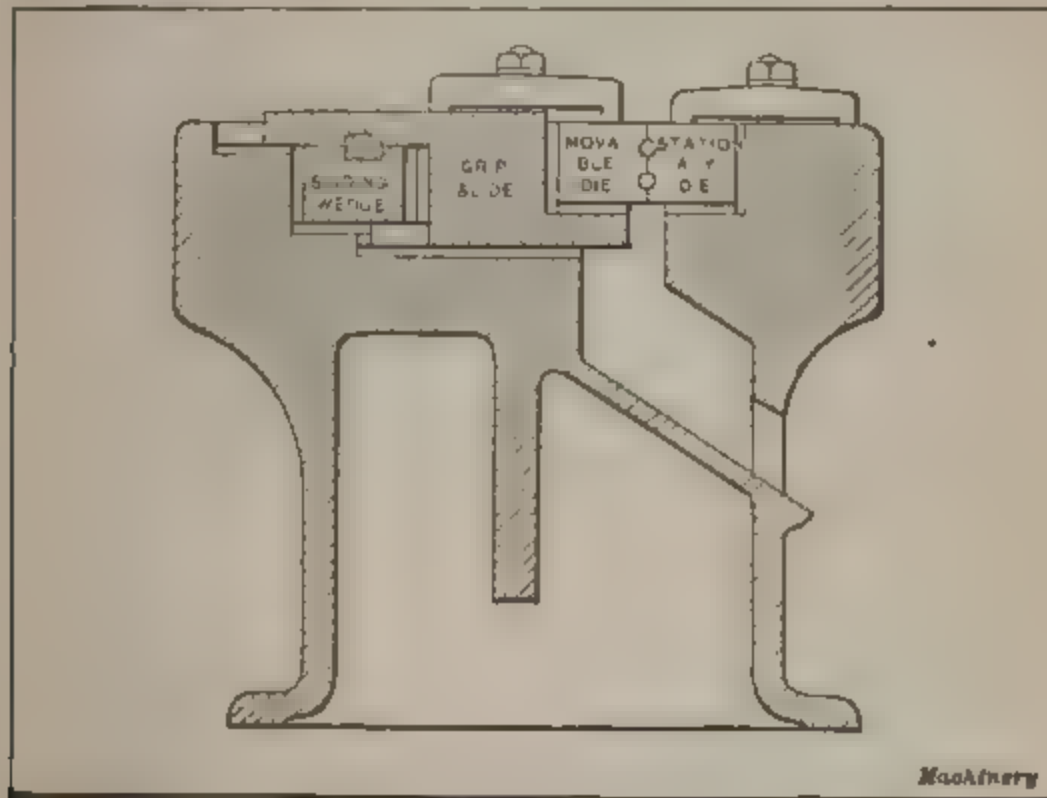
Section through Die Box of the National Wedge-grip Bolt and Rivet Header
